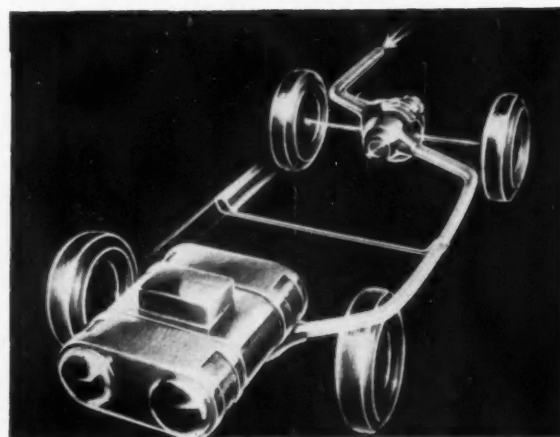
The XP-500 chassis was designed to take advantage of the split powerplant arrangement of the "Hyprex" engine. Gasifier is in front; turbine and transmission are in the rear. Exhaust gases are piped through the left frame sill; hydraulic lines through the right sill.
